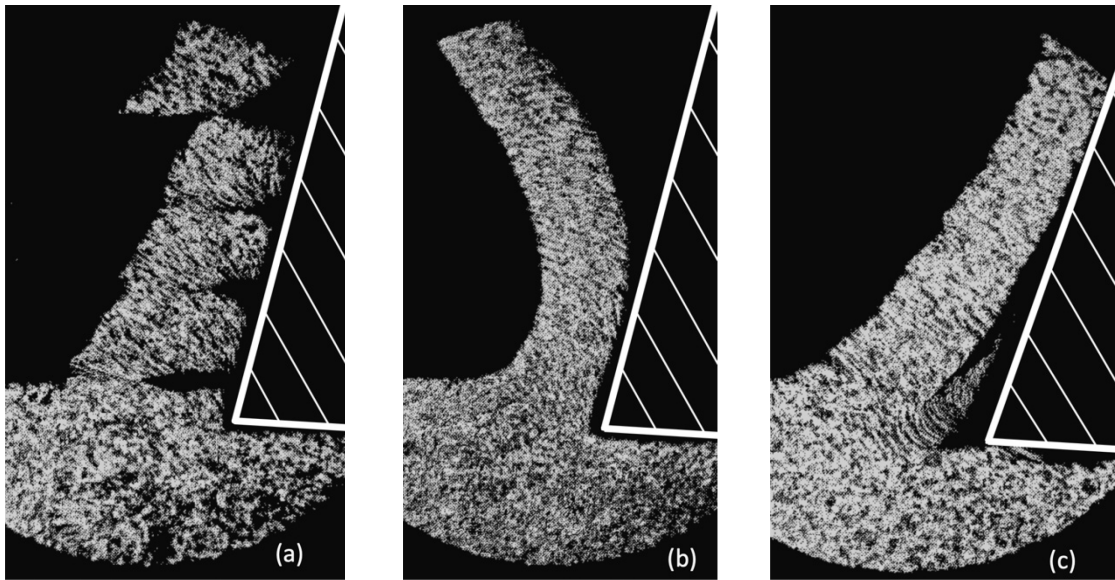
The three basic chip types according to Ernst: (left to right), Type 1 (a), discontinuous or segmental chip; Type 2 (b), continuous chip without built-up edge; Type 3 (c), continuous chip with built-up edge. Adapted from [25]
